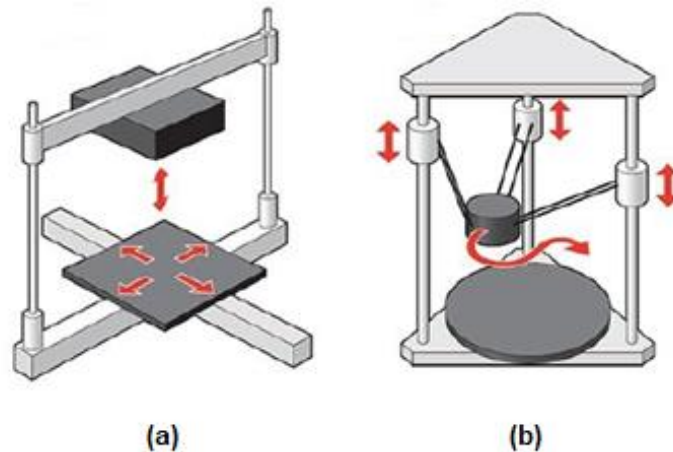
3D printer configuration: (a) cartesian; e (b) linear delta. Adapted from [9].
